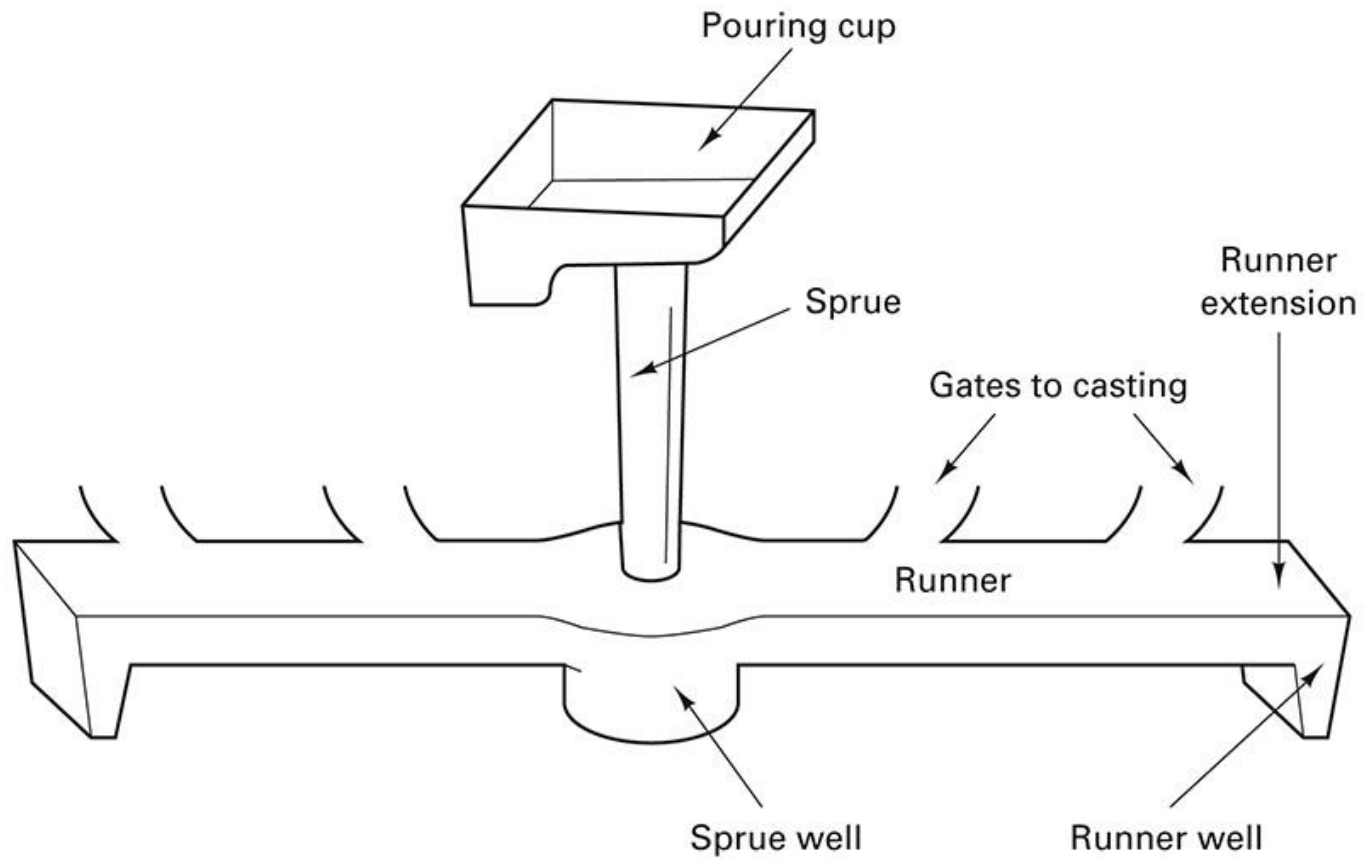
Typical gating system for a horizontal parting plane mold, showing key components involved in controlling the flow of metal into the mold cavity.
